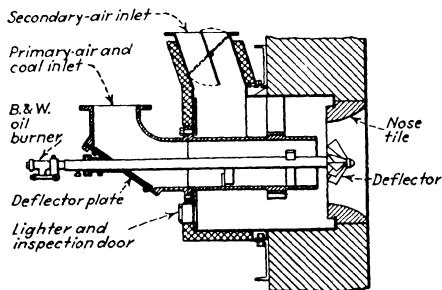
Circular burner for pulverized coal. (Babcock and Wilcox Company.)
